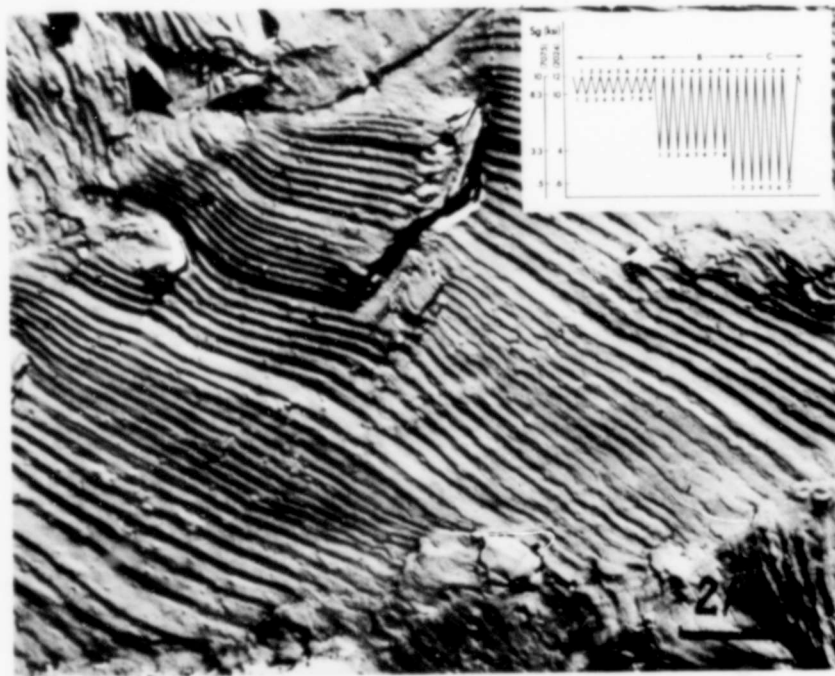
Typical fracture surface due to Program P1. ($2a = .7$ inch)
